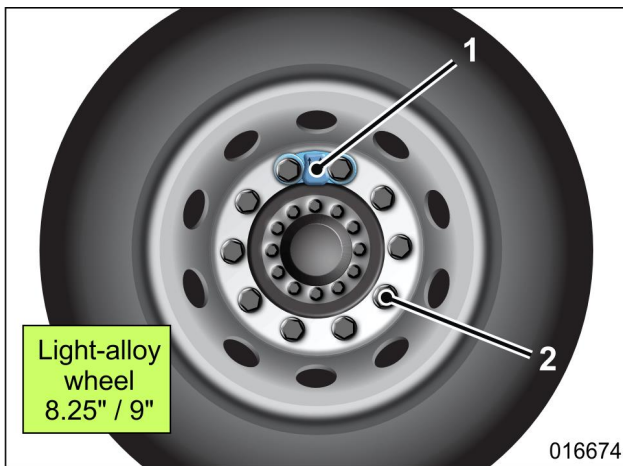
Installation of WEM on drive axle wheels and dual mounted trailing axle wheels (8.25" and 9")
